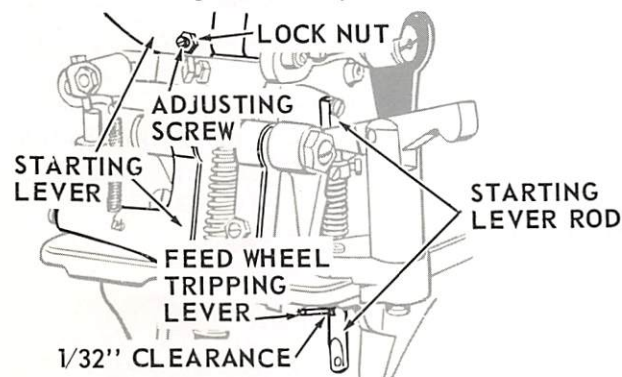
Clearance between Feed Wheel Tripping Lever and its Engaging Notch in Starting Lever Rod
